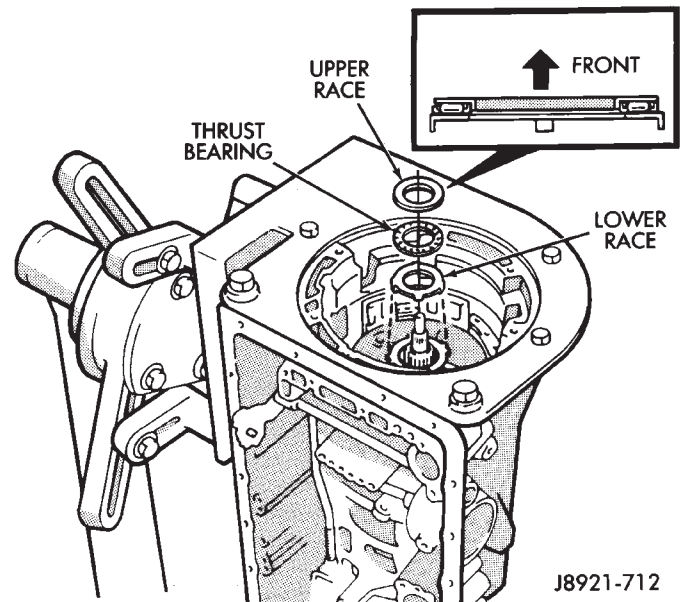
Installing Overdrive Support Thrust Bearing And Races
